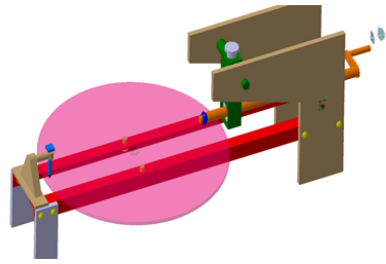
Design model of the gasket cutting machine (Catia User Manual).
